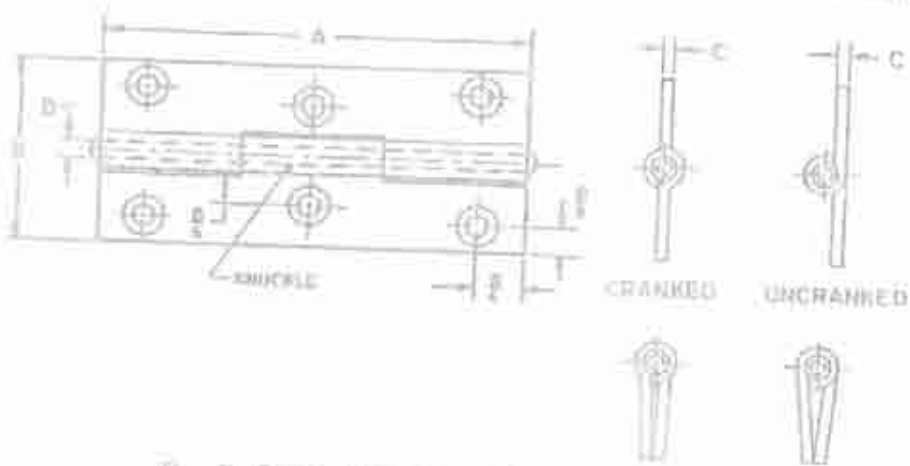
SHEET BRASS BUTT JOINTS (CRANKED)
